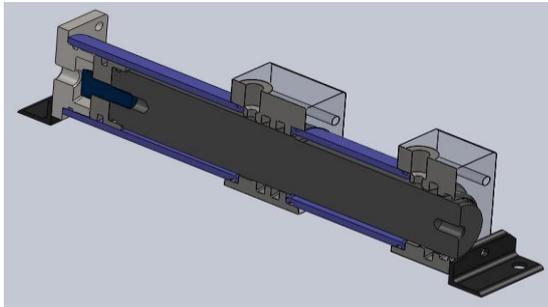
Cut-Section of Hydro-Pneumatic Intensifier Assembly (3D)
